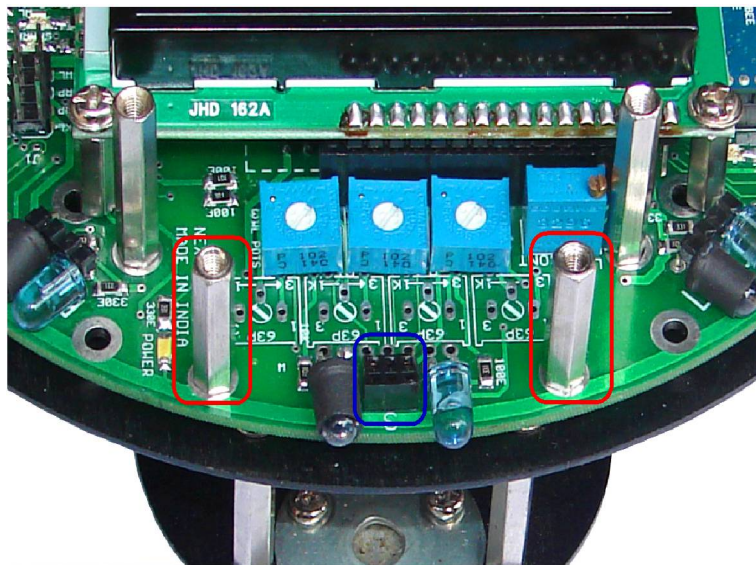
Mount 20mm studs from the Sharp sensor mounting kit
